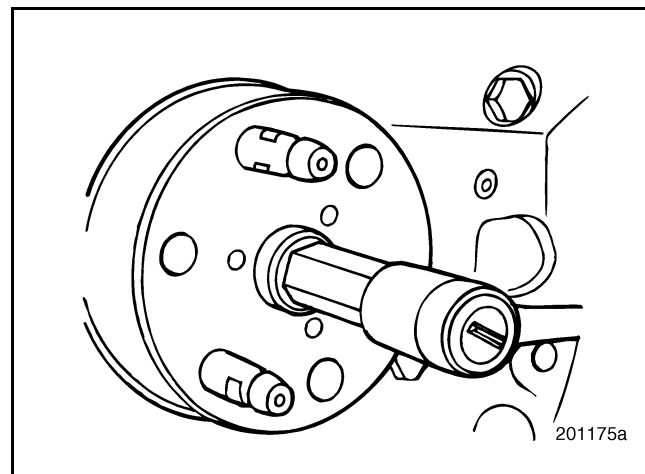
Crankshaft Wear Ring (with Double-Lip Teflon® Seal) Installation
